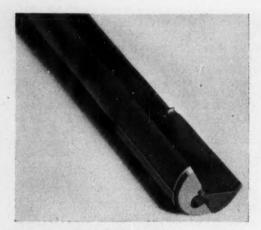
Close-up View of the Tip of One of the Carbide-tipped Gun Drills Employed on the Machine in Fig. 8, Showing the Central Hole Through which the Cutting Oil is Pumped and the Form of the Cutting Edge
